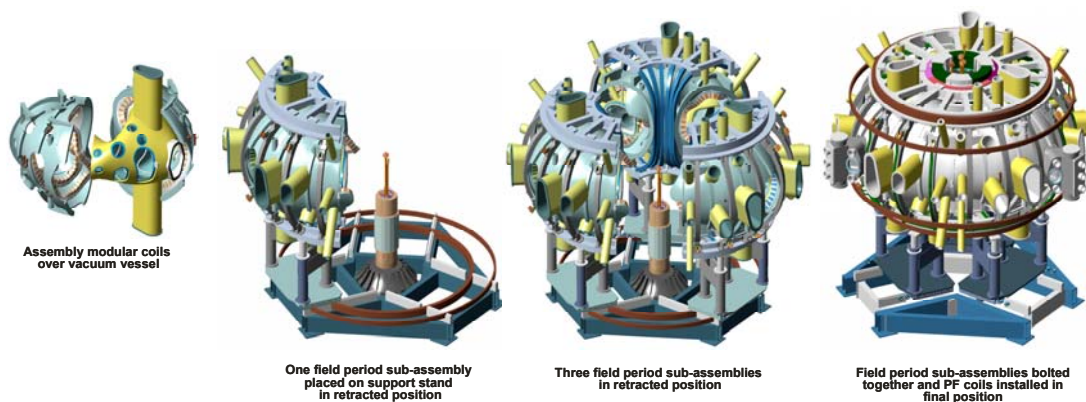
NCSX assembly sequence, showing field period subassembly and final assembly.
